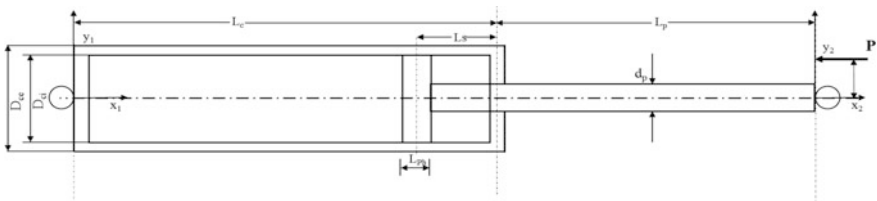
Schematic view of hydraulic cylinder arrangement [7]
